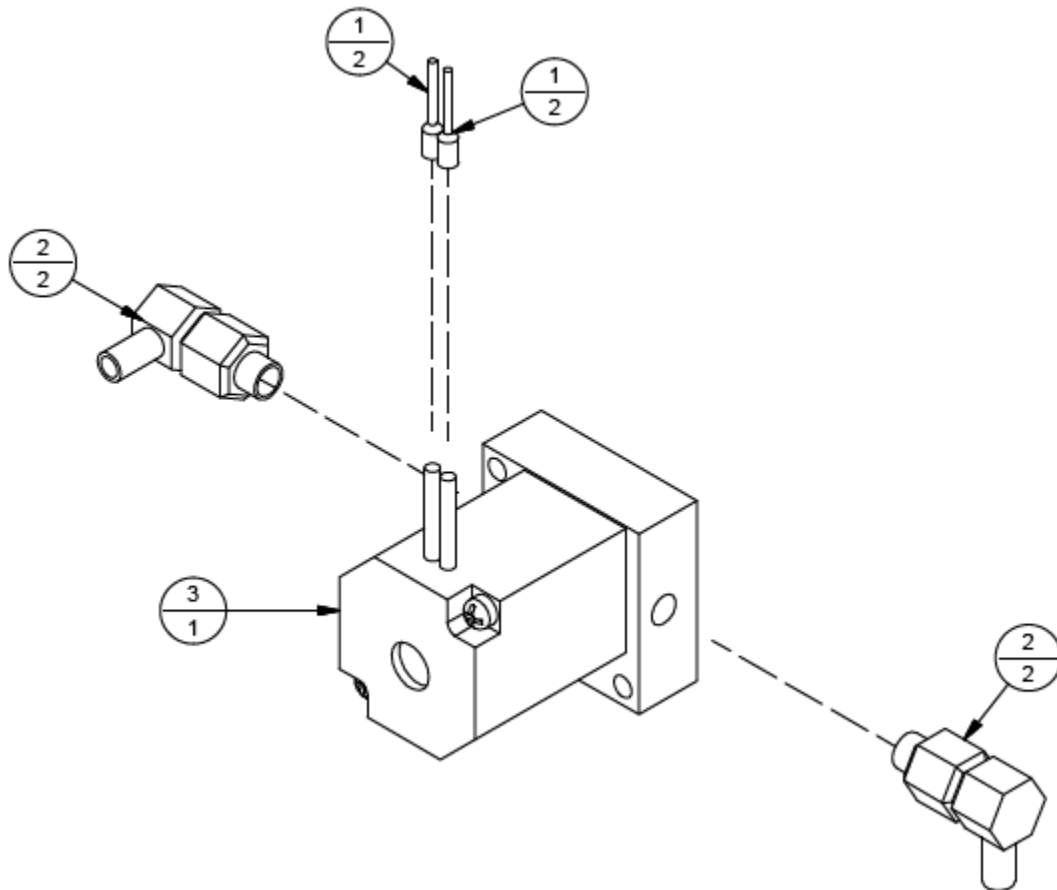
9107912A – Solenoid Valve Assembly, 2-way, Air
